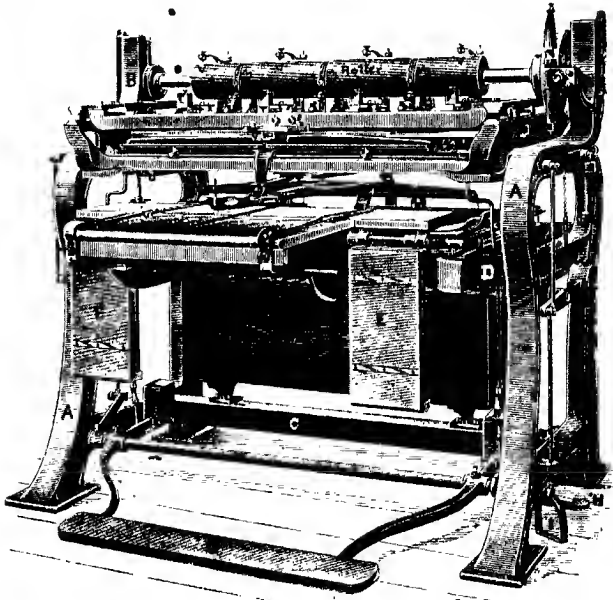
New and Improved Flat Table Pentagraph Machine (Shields' principle).
